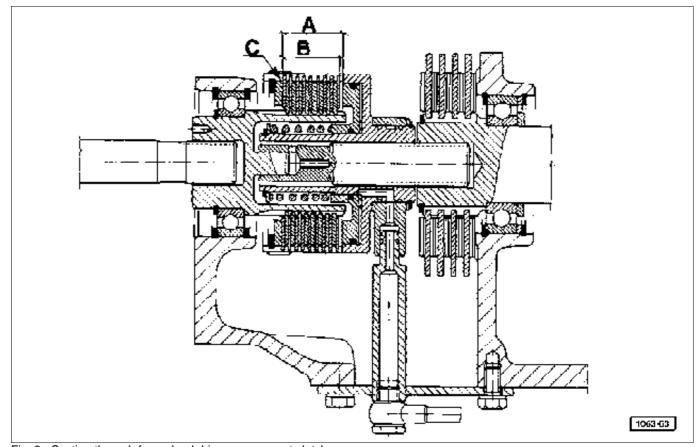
Section through four-wheel drive engagement clutch Check the clearance of the assembled discs (distance A - B). If the clearance is greater than 3 mm, add a further intermediate disc C at the position illustrated.
